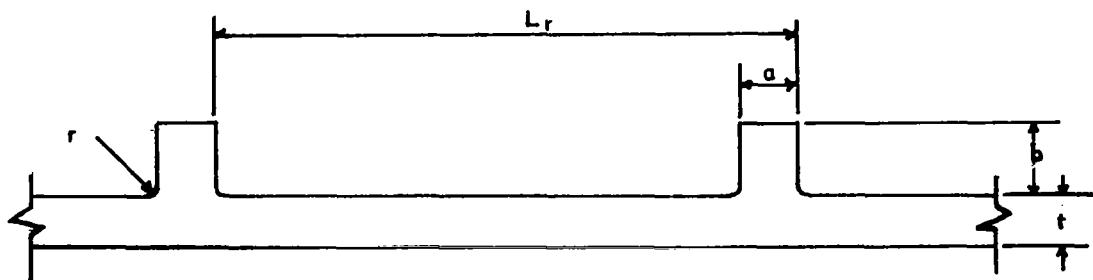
LONGITUDINAL CROSS SECTION OF CYLINDER WALL
